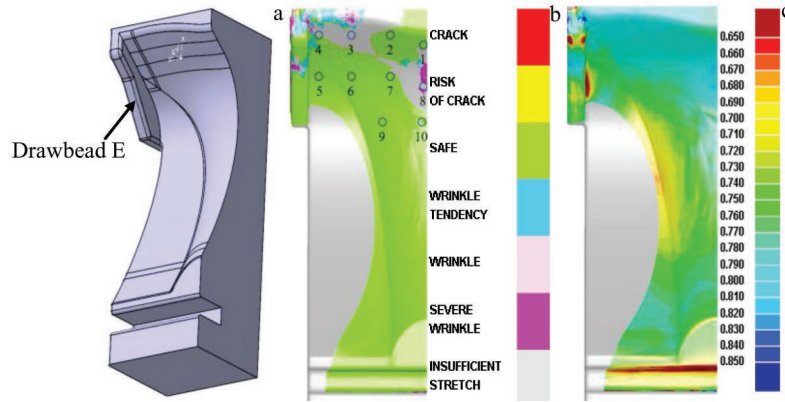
Schematic diagram of saddle shape part with Drawbead E (a); predicted wrinkle (b) and thickness (c) distributions of saddle shape part with Drawbead E under Barlat 89 yield criterion
